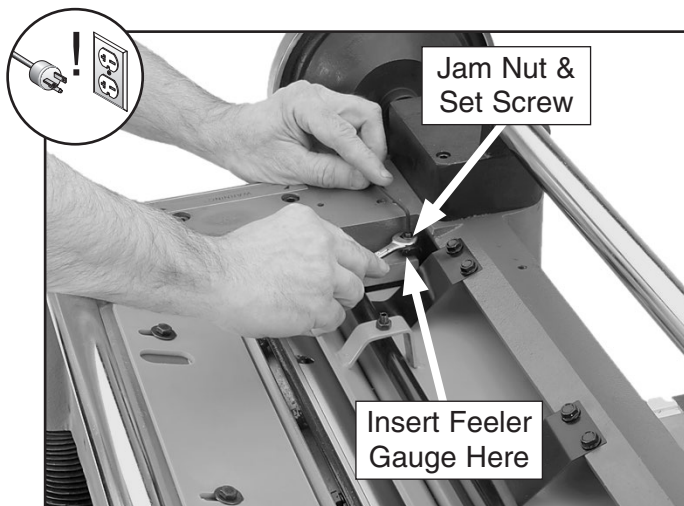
Feeler gauge location for adjusting pressure bar height when using wood blocks.
